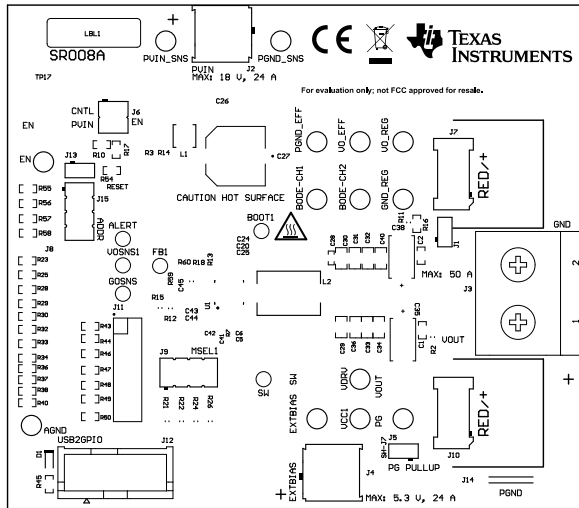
TPS546C25EVM-1PH Top Side Overlay View (Top View)
